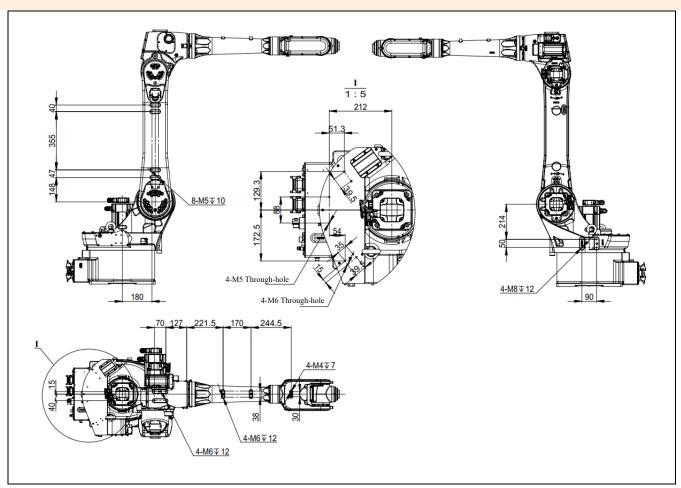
Equipment mounting face (QRC-405 Eco)
